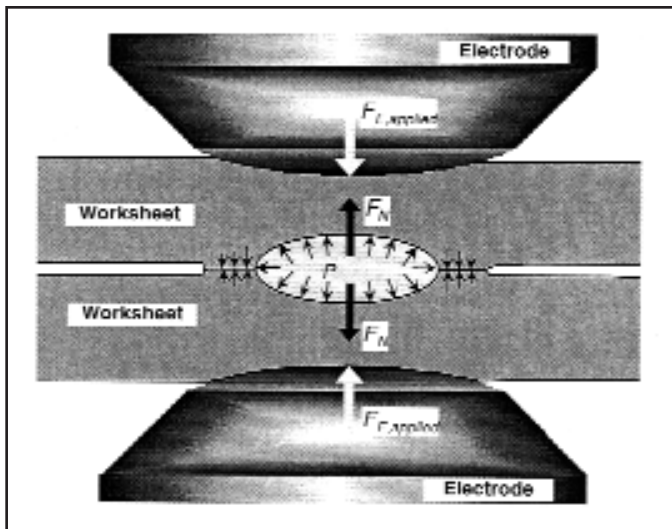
Forces acting on the weldment during resistance spot welding in idealized conditions with aligned electrodes and perfect fitup.
